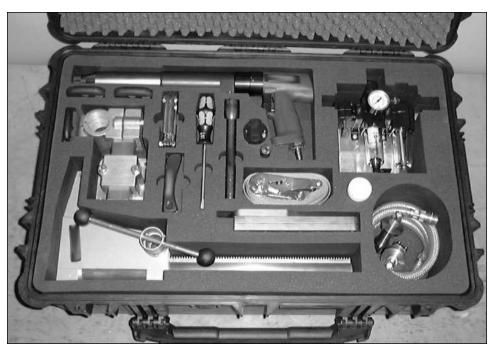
MACHINE CASE VM2150 WITH PNEUMATIC DRIVE
